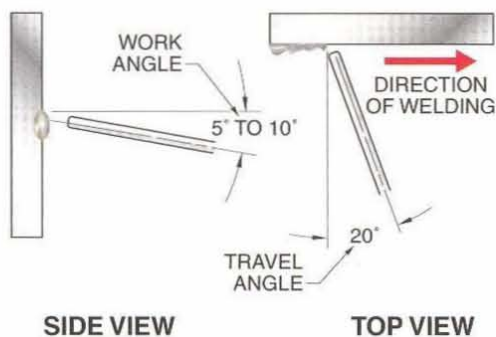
When welding in horizontal position, hold the electrode at a work angle of 5° to 10° and a travel angle of 20° .
